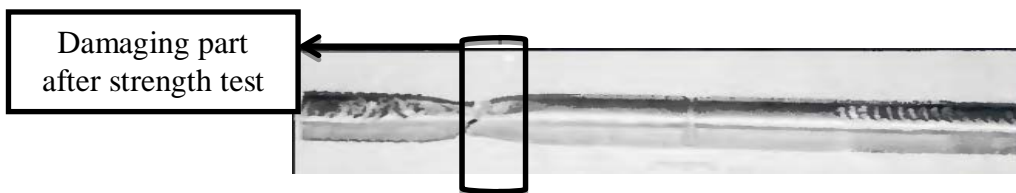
Strength test on a fitting undergone welding forging (Rajamani et al. 1991)
